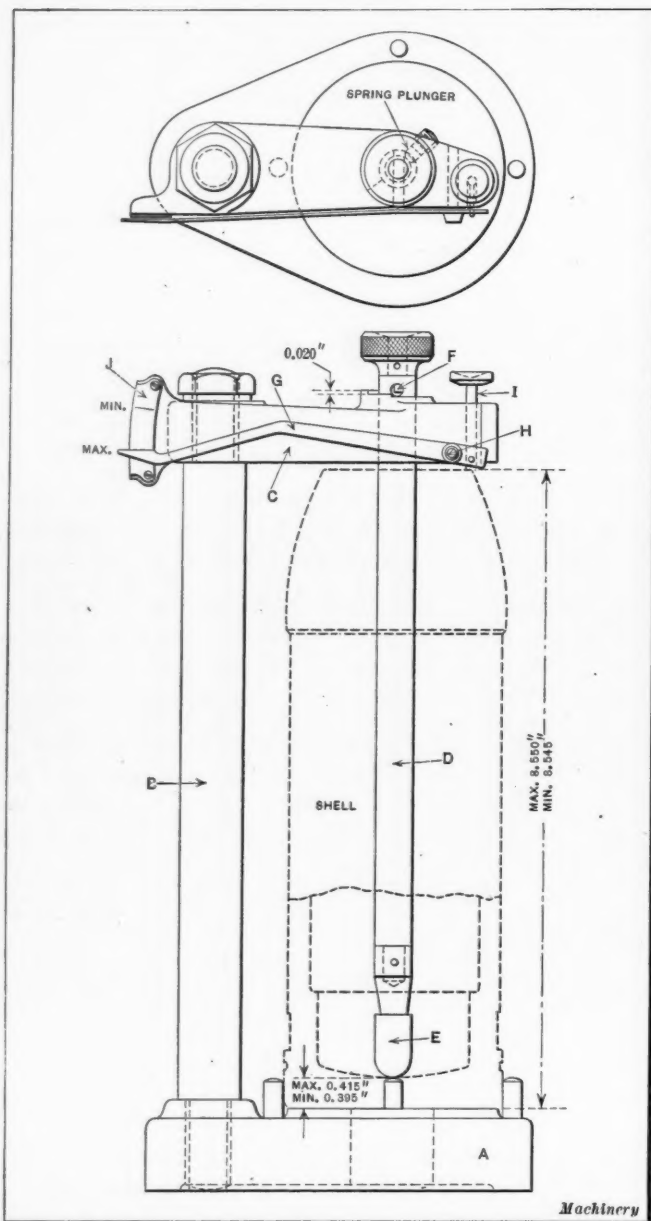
Indicating Height Gage used for inspecting Thickness of Base and Over-all Length of Shrapnel Shell
